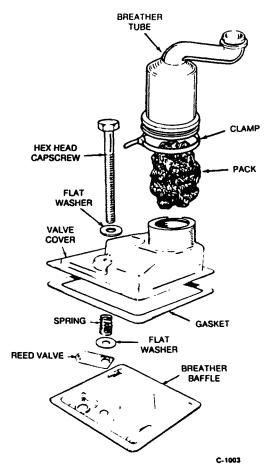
A. CRANKCASE BREATHER - P216, P218, P220
